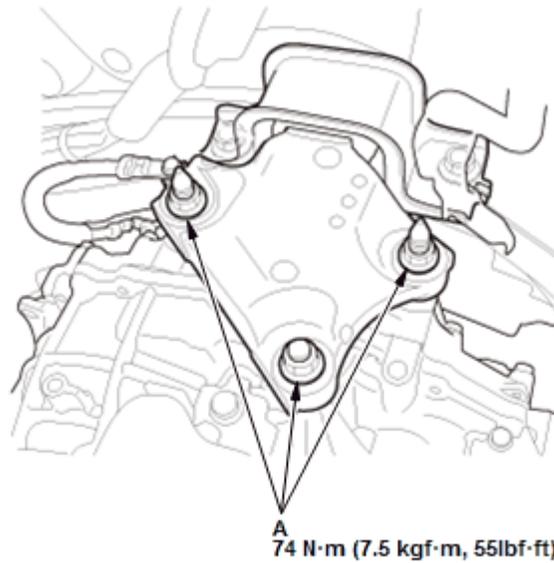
Transmission Mount Mounting Nut With Torque Specifications
